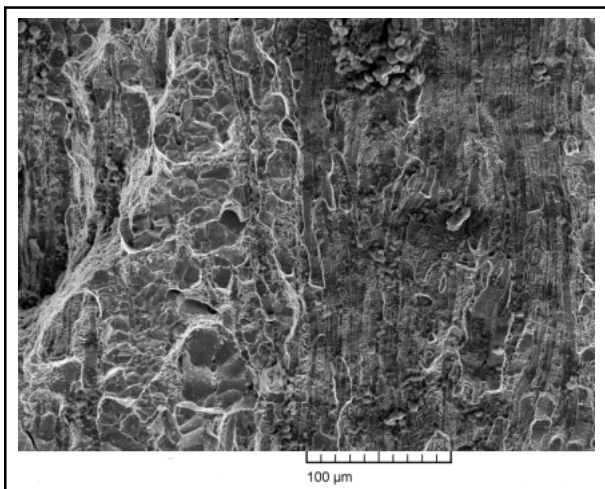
This higher-magnification view of the woody secondary fracture shows that intergranular fracture is also associated with it.
